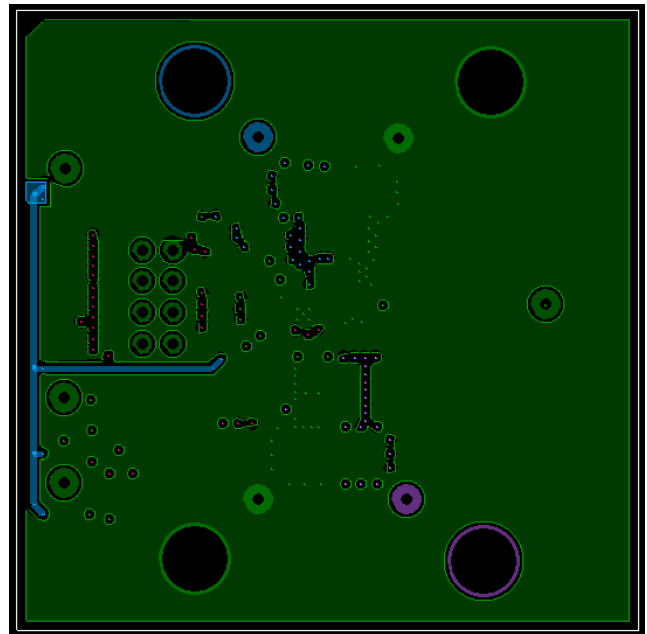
INNER LAYER 1 (TOP VIEW)
